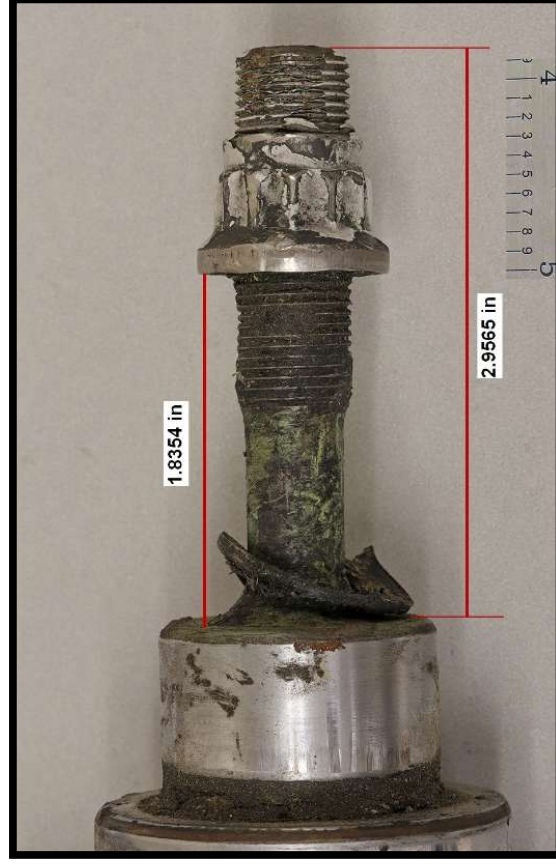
Detailed view of R/H MLG- Tee Bolt. Note: Nut is still attached and washer is deformed.
